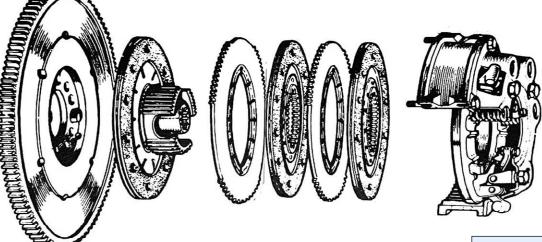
English Borg & Beck multi - plate clutch has three driven plates.
